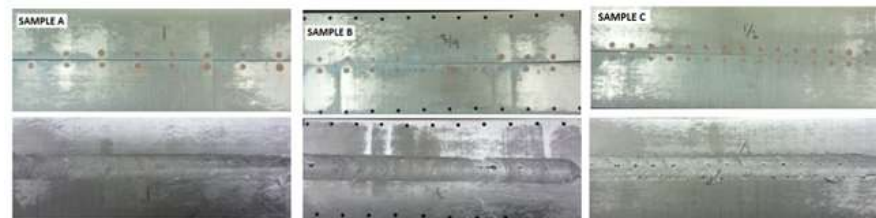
Copper inserted aluminum bars (top) and frictional stir welded plates (bottom)
